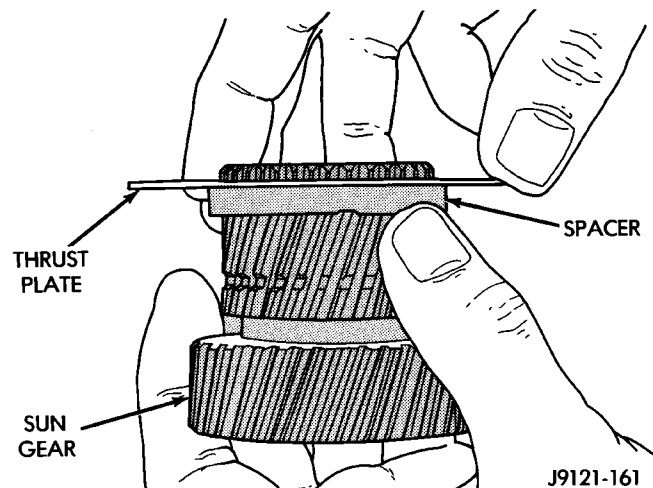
Installing Driving Shell Front Thrust Plate On Sun Gear
